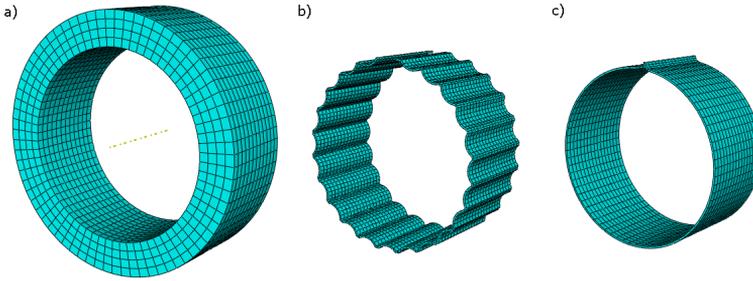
FEM models of foil bearing elements (a – sleeve, b – bump foil, c – top foil) [6]
